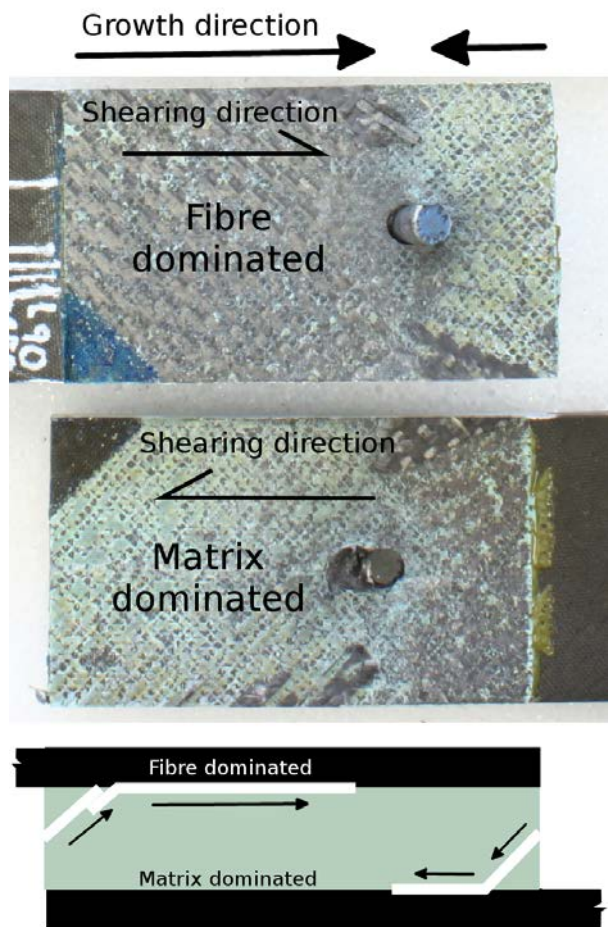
Fatigue crack fracture surface with explained angled crack mechanism leading to fibre and matrix dominated fracture.
